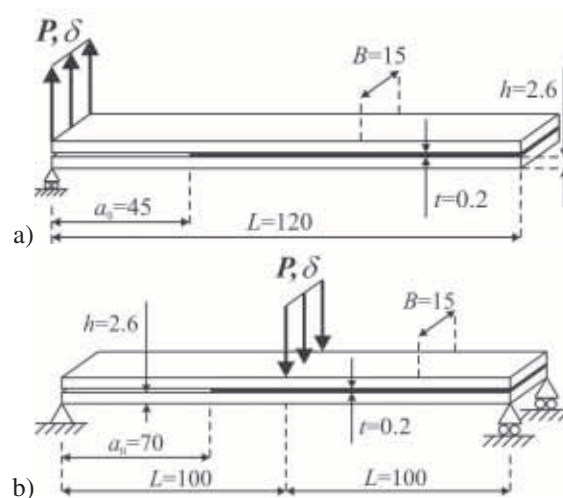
Geometry of the DCB (a) and ENF (b) specimens (dimensions in mm).
